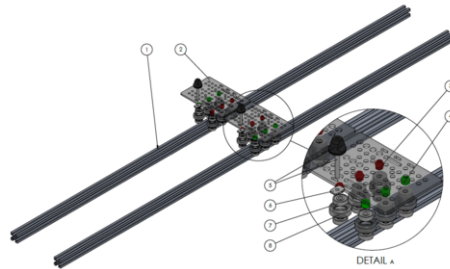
Gantry plates, bottom plate assembly including locking nuts.
